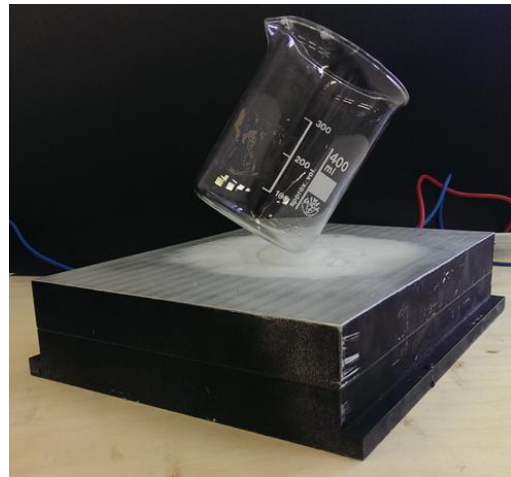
Example of workpiece holding using ice adhesion on the cryo fixture, showing a glass beaker frozen into position
